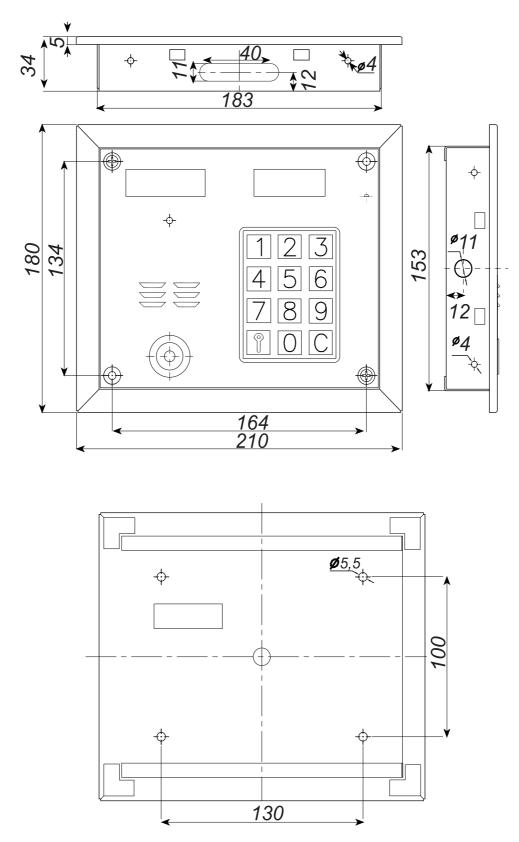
Dimensions of panels CP-2501xx with a frame for mounting under plaster
